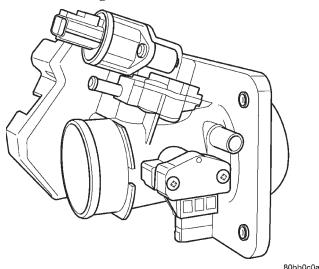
Throttle Position Sensor and Idle Air Control Motor
